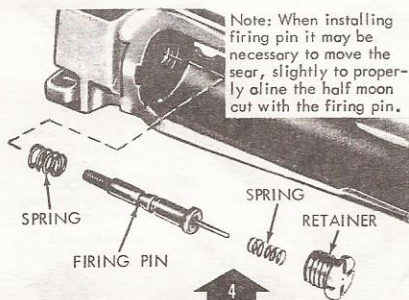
Disassembly/Assembly of Grenade Launcher (Operator and Organizational Maintenance)
